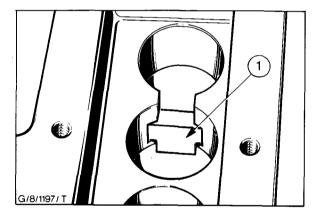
Tappet Locating 'T' Piece 1. 'T' Piece
